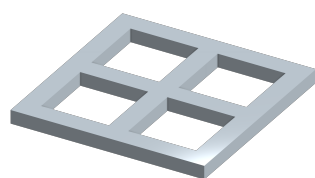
Proof-of-concept design (STL file) for printing accuracy testing.
